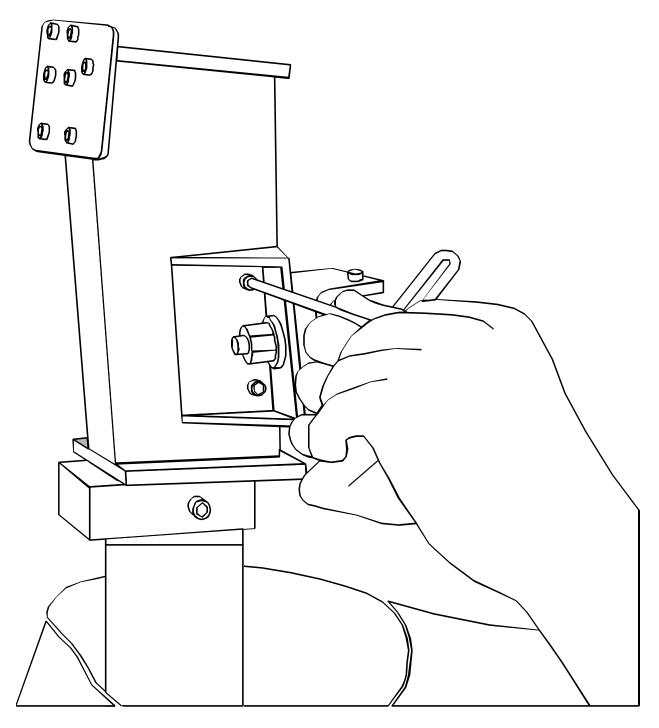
SHOCK ABSORBER ASSEMBLY
